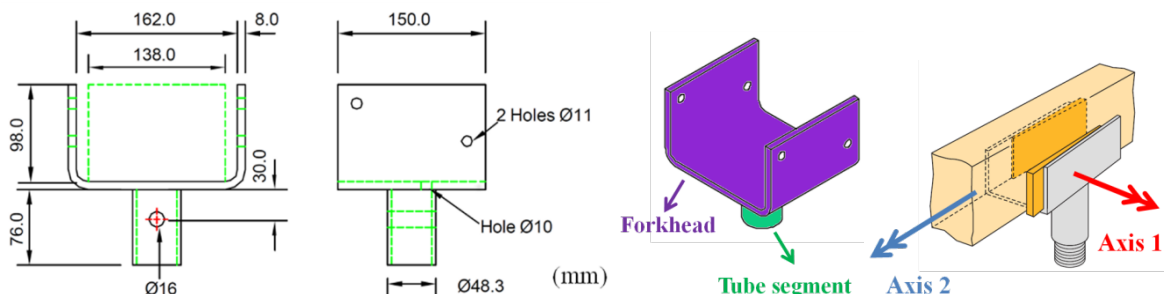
Nominal dimensions of the forkhead and illustration of the bending axis (SGB, 2009).
